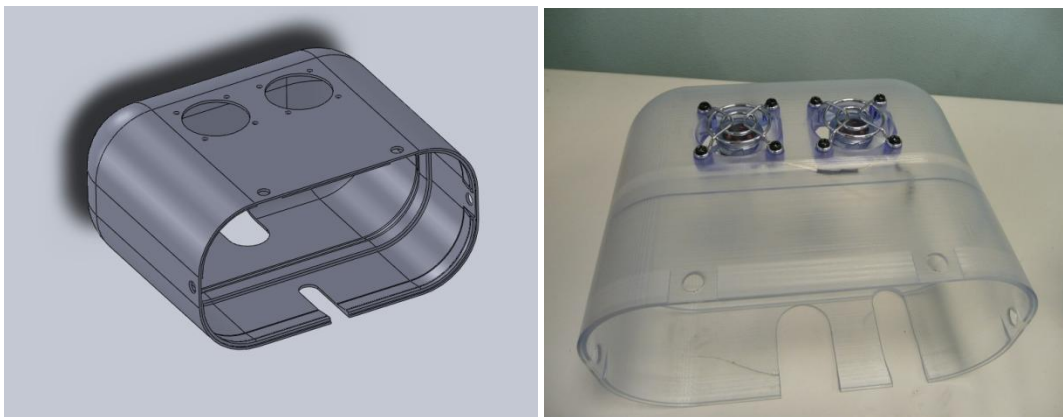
CAD model and actual image of head cover with fans and finger guards
